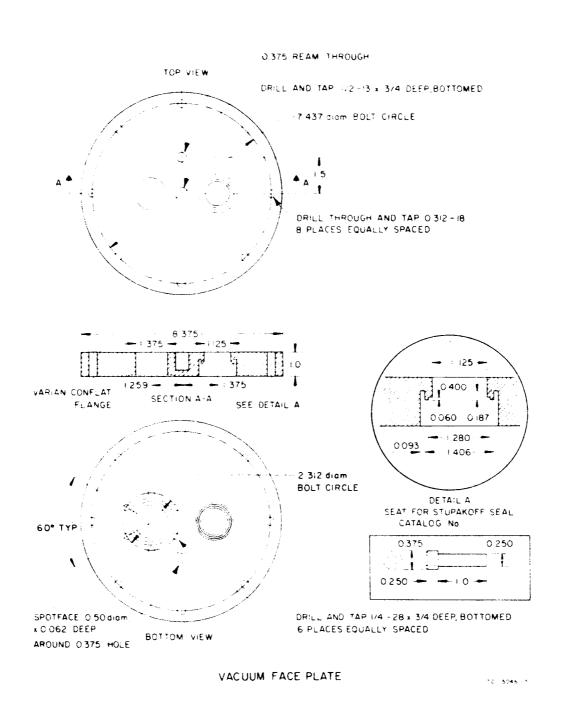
DESIGN DRAWING FOR VACUUM FACE PLATE FOR 8-MONTH STORAGE UNITS
